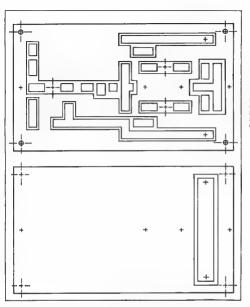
Double-Sided Printed Circuit Board Layout (actual size).
